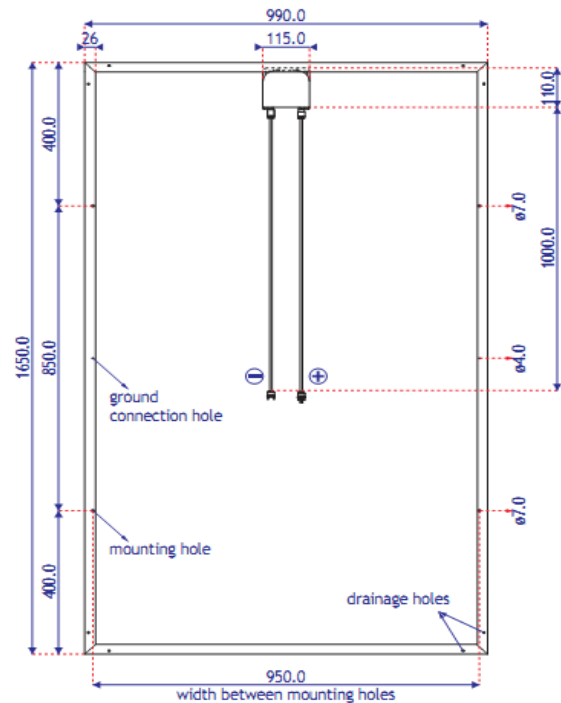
Mechanical drawing of an SLA module showing the mounting holes, the drainage holes, and the ground connection holes
